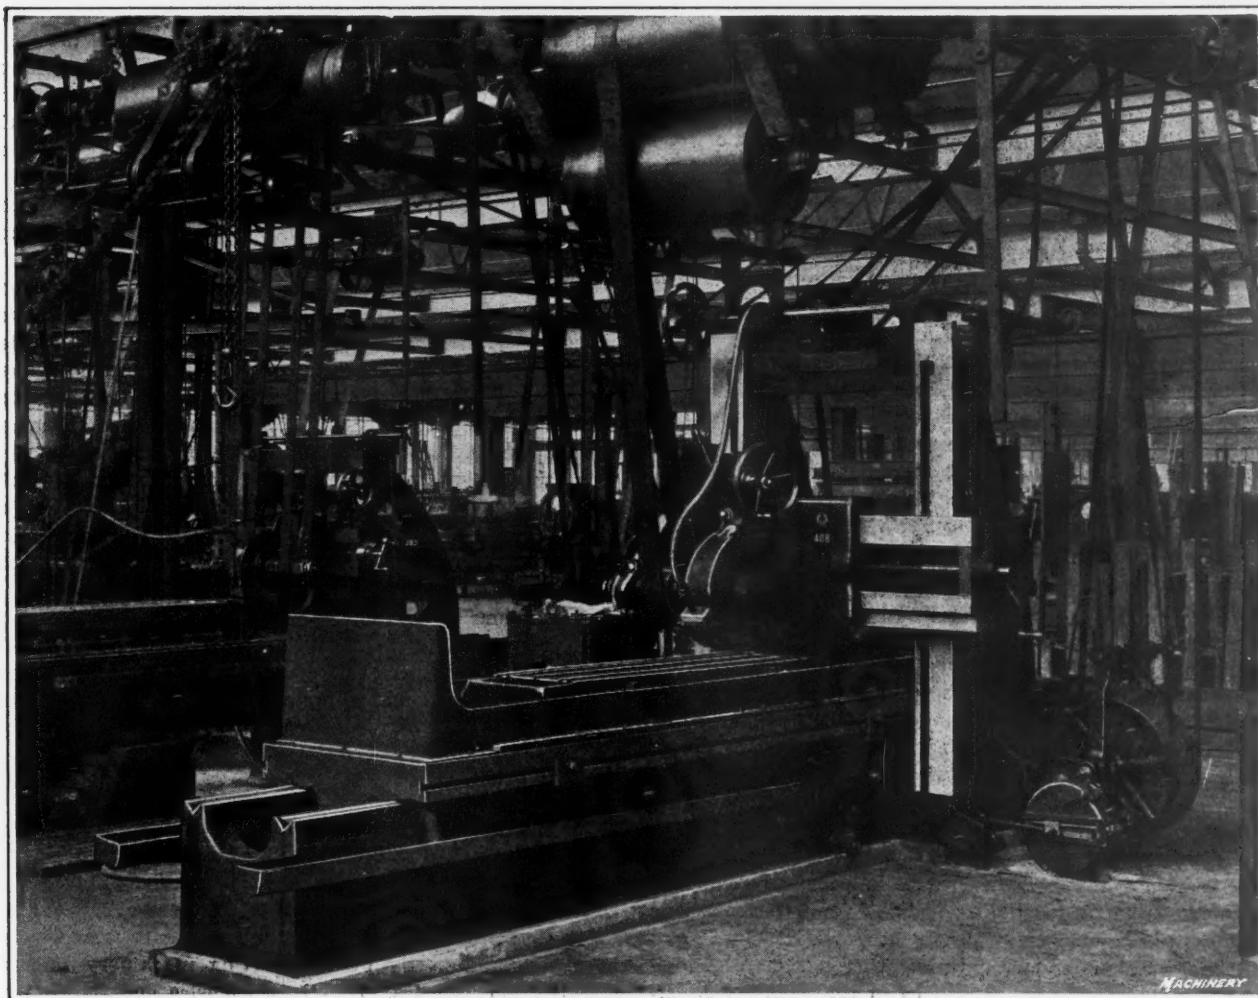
Planer adapted for grinding Large Flat Surfaces
